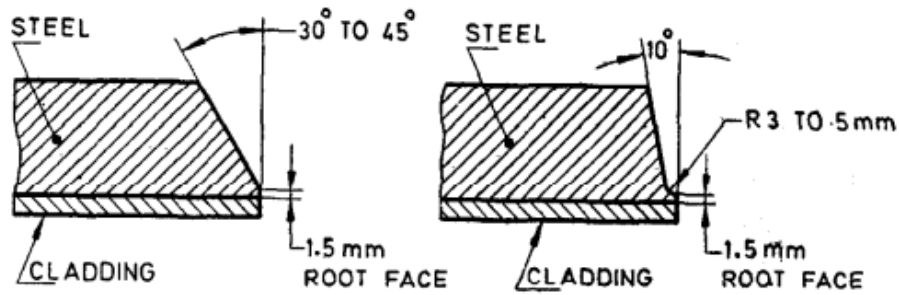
ACCEPTABLE TYPES OF EDGE PREPARATION OF CLAD PLATES FOR WELDING
